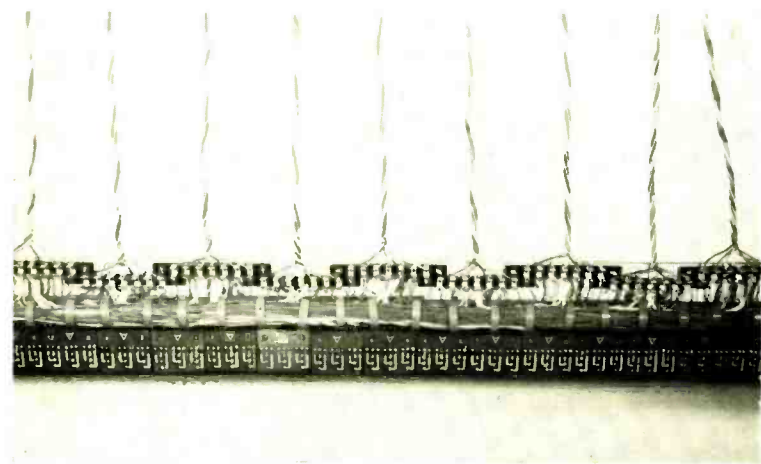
Rear view portion of completed key switch assembly, showing nine of the twelve cables leading to the tone generators.
